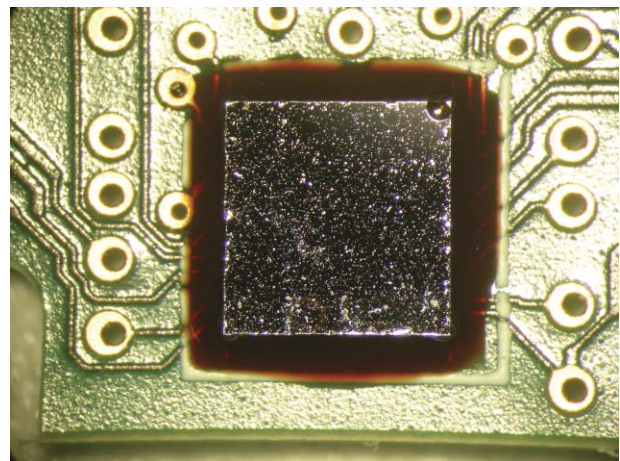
Underfill on one of the test structures used in the recovery firing test.
